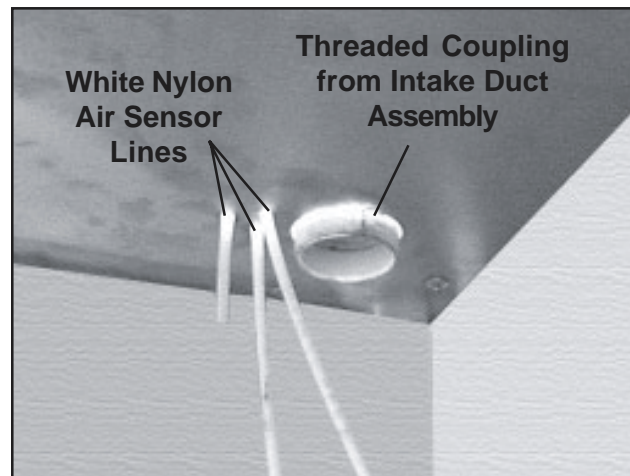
Air Sensor Lines & Coupling Passing Through Right Ceiling Panel
